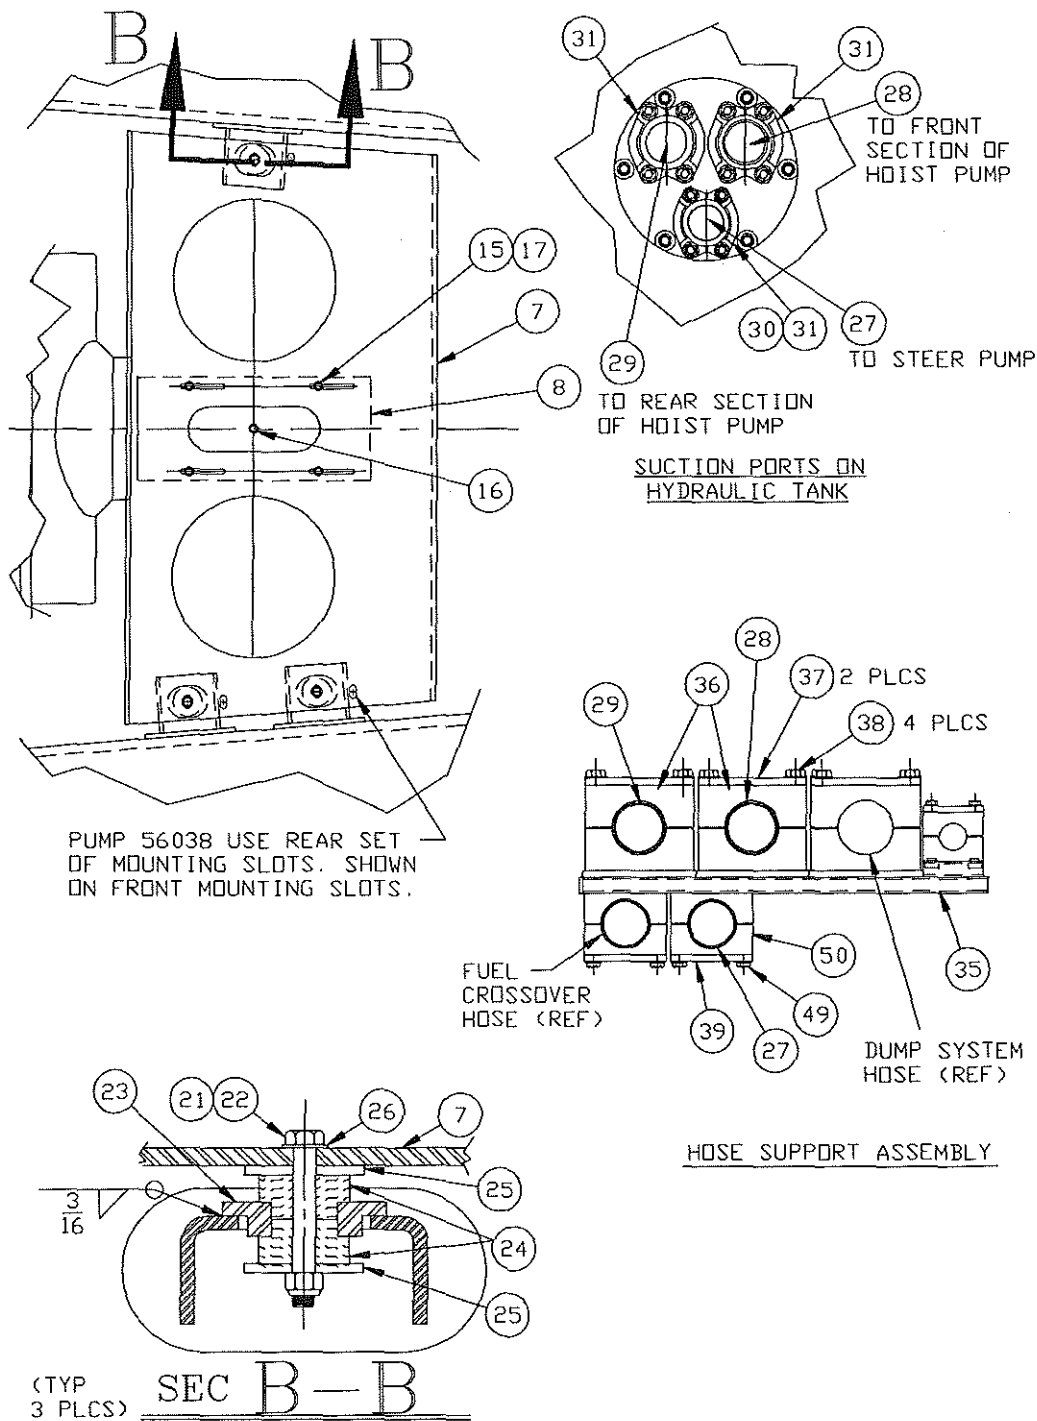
HYDRAULIC PUMP INSTALLATION (A84203, SHEET 2 OF 2)
